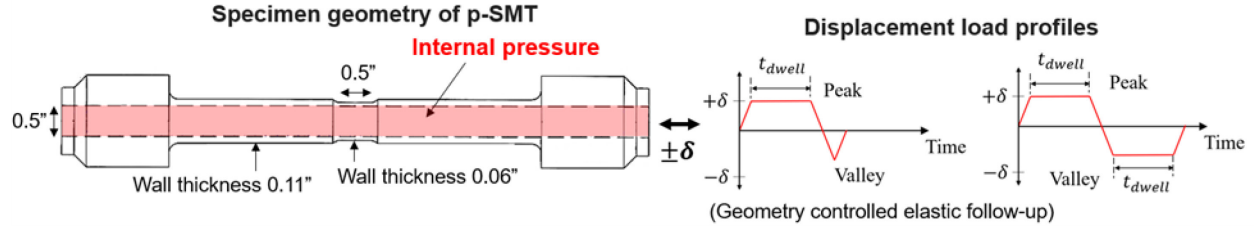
Test specimen geometry and load profiles of pressurized simplified model test (p-SMT) test specimen [11–13].
